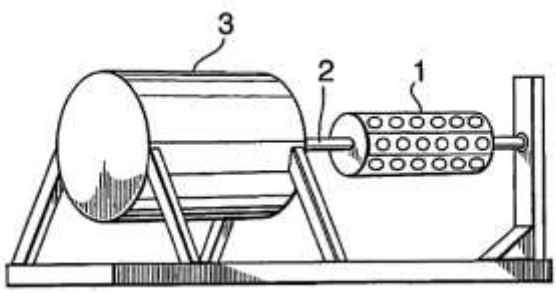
is a schematic of an apparatus of a preferred embodiment of the present invention; FIG. 2 is a detail view of the magnet holding shaft of the apparatus of FIG. 1.
